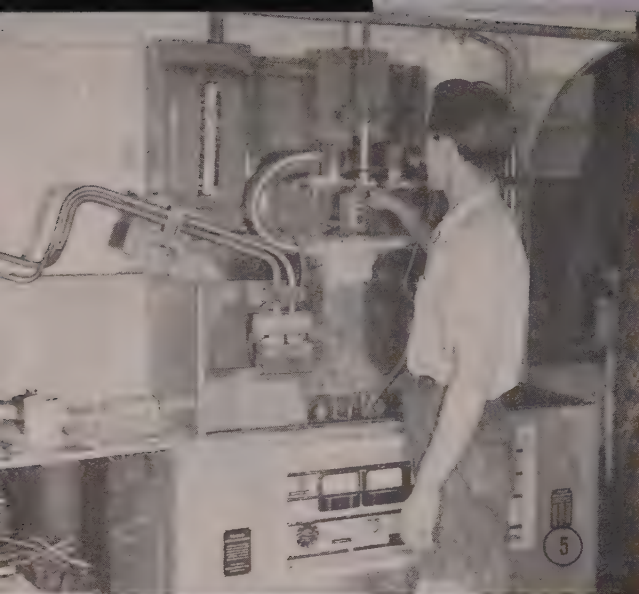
Silver brazing hydraulic tube assemblies is accomplished on this 20-kilowatt 9600-cycle unit
